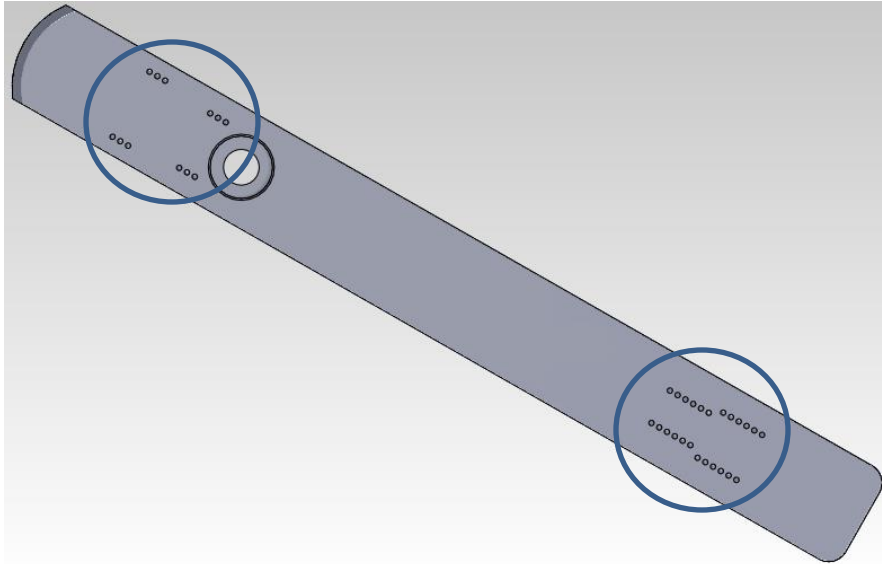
DP1.1-Top view of the upper plate section showing a possible mounting hole configuration.
